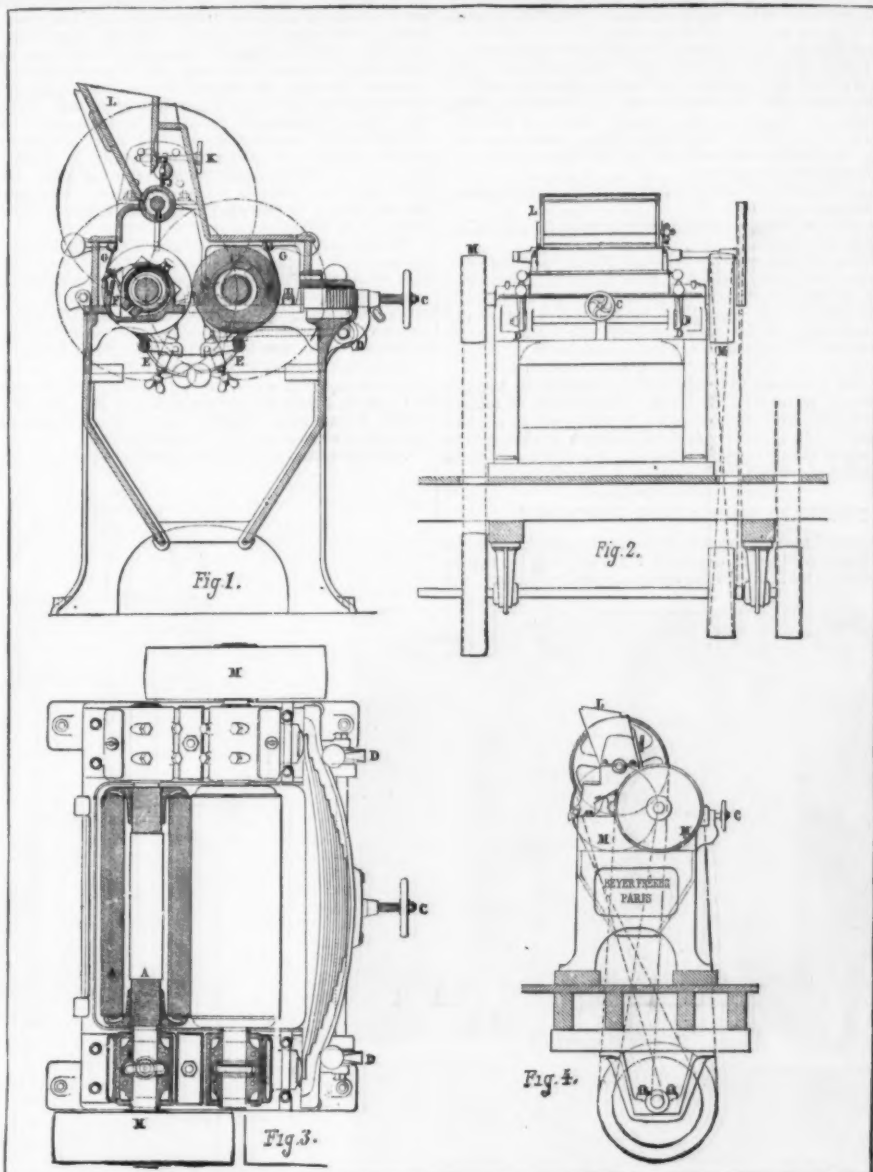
Sectional Elevation. (Scale 0.08 m. = 1 m.) FIG. 2.—Front Elevation. (Scale 0.04 m. = 1 m.) FIG. 3.—Plan. FIG. 4.—Profile.
